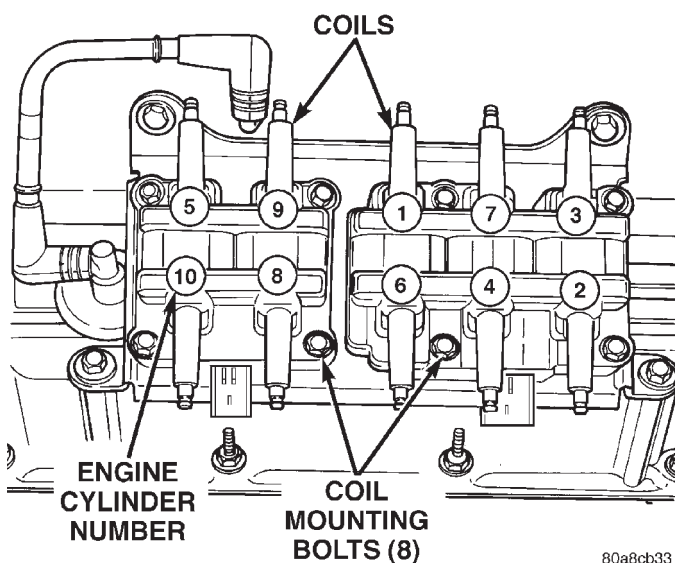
Ignition Coil Packs—8.0L V-10 Engine
